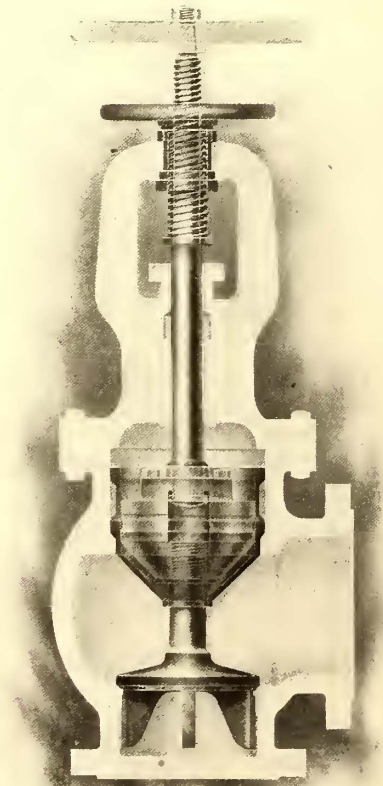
CUSHIONED NON-RETURN VALVE WITH AUXILIARY HAND WHEEL
